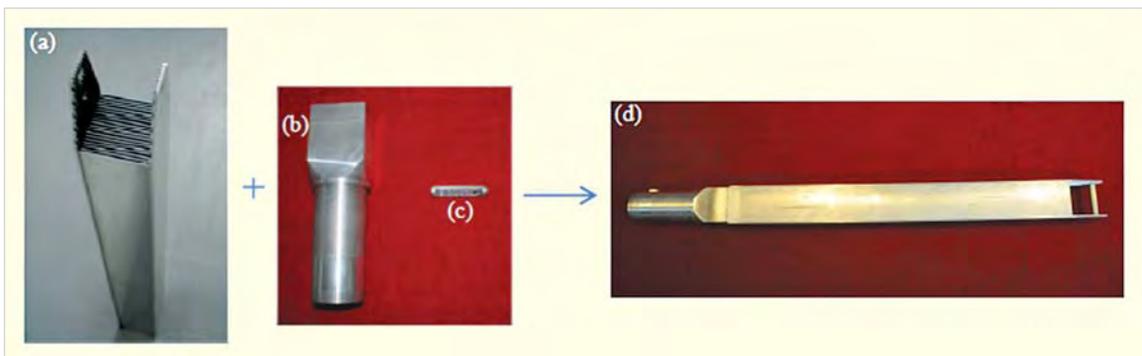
Photograph of components and standard fuel assembly of modified core of APSARA reactor (a) Fuel box, (b) Toe section, (c) Handling pin, (d) SFA
